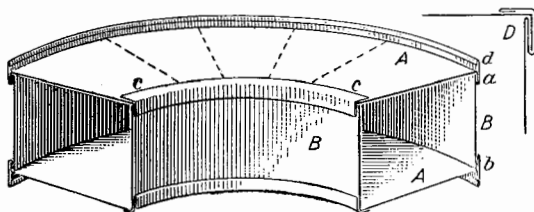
Quick Method of Seaming Large Elbows, Without Riveting
